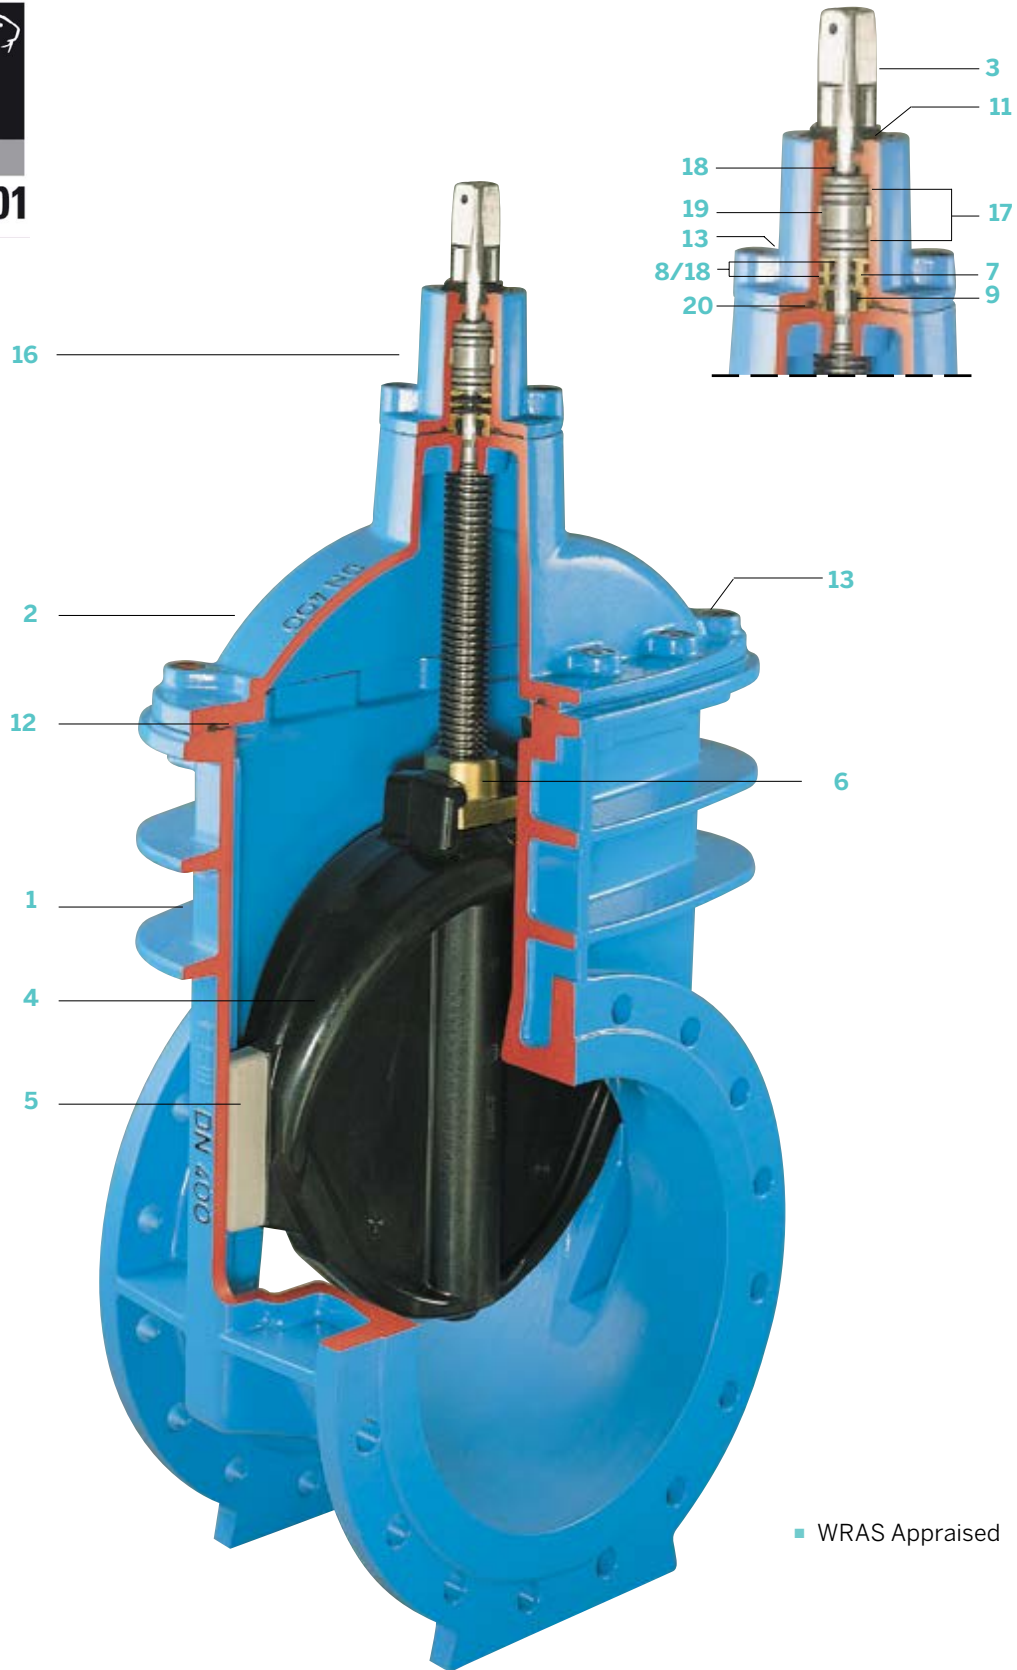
E2 Valve Flanged Ends DN 250 – 600
